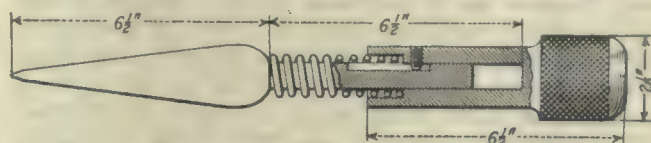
DETAILS AND DIMENSIONS OF DRIFT
